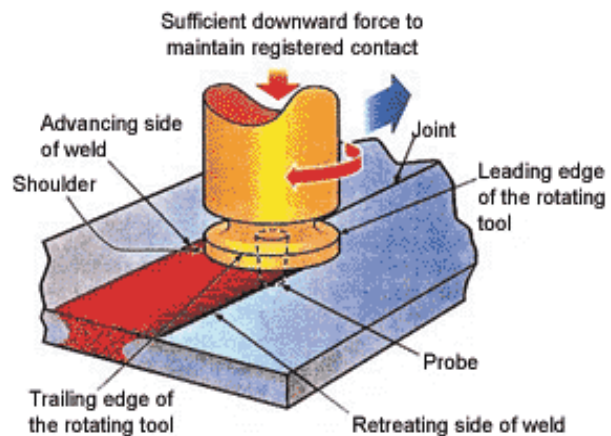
FRICTION STIR WELDING PROCESS
